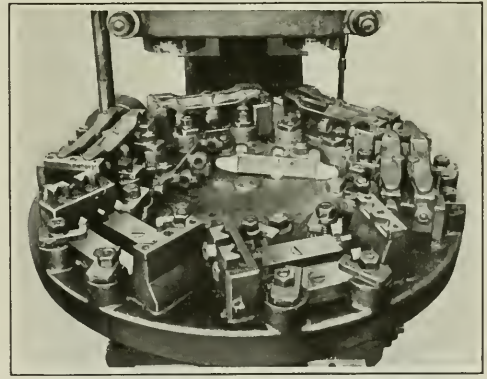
First Operation on Valve Rocker-arm Brackets in which the Bottoms are machined
